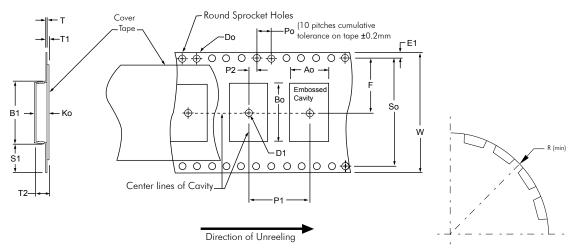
Standard Embossed Carrier Tape Dimensions
